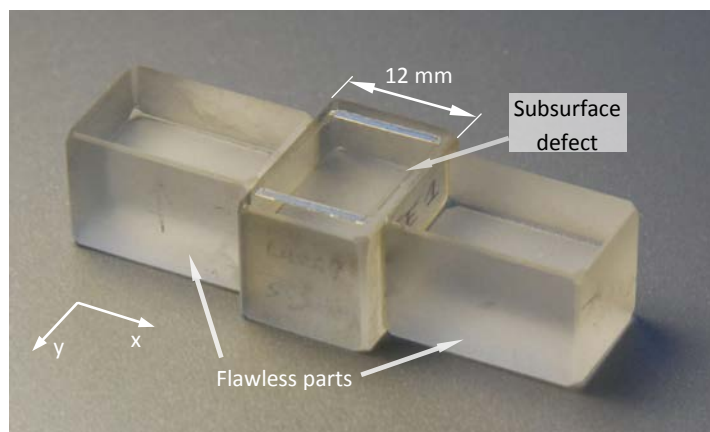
The specimen “D1+” tested in the sliding technique experiments. It is an assembly of three specimens of fused quartz, two flawless and one defected.
